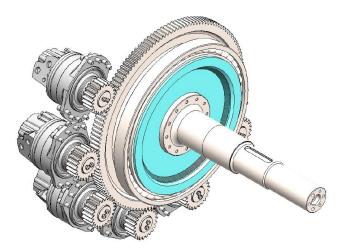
E-brakes or hydraulic units attached to the gearbox and low speed shaft pinions
